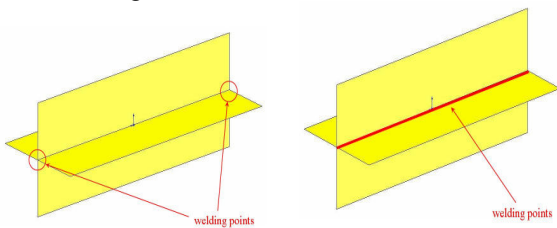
Cross spot welding      Figure 2 Through welding
